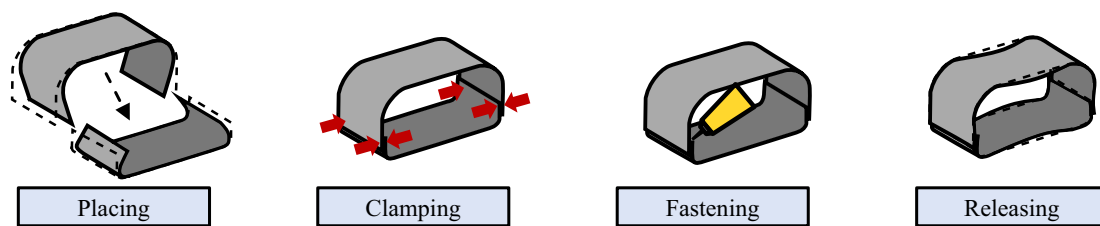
Assembly process of composite parts using the placing, clamping, fastening and releasing principle
